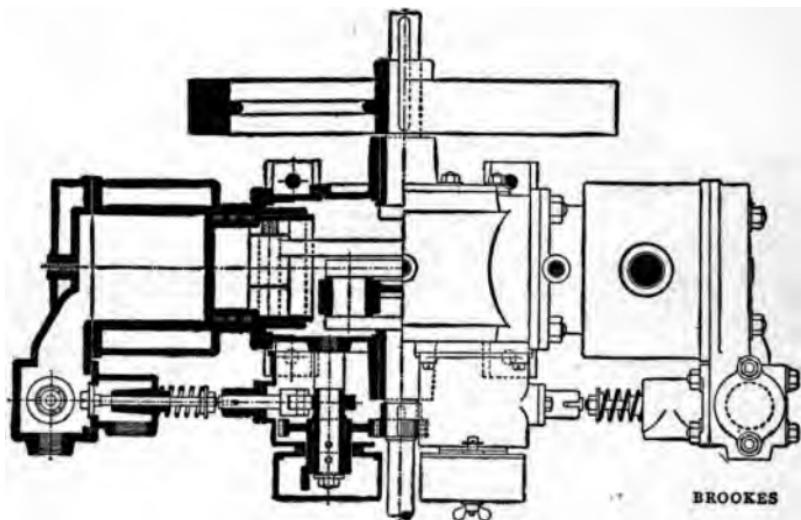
Top view and part section of a two-cylinder opposed engine; showing section of one piston, ends of two pitmans and the common crank-shaft.
